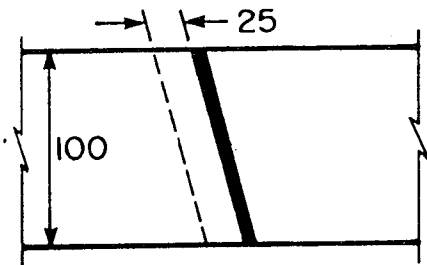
5 mm Fillet Weld Test Specimens
